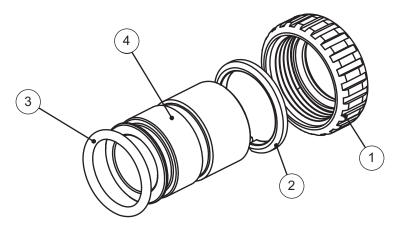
1" Brass Sweat Assembly (CV3007-02)
